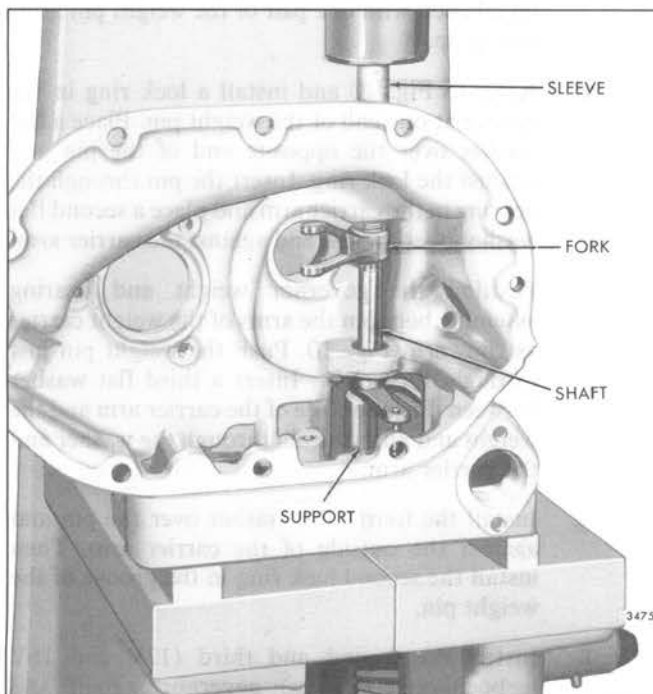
Installing Governor Operating Shaft Fork on Shaft
